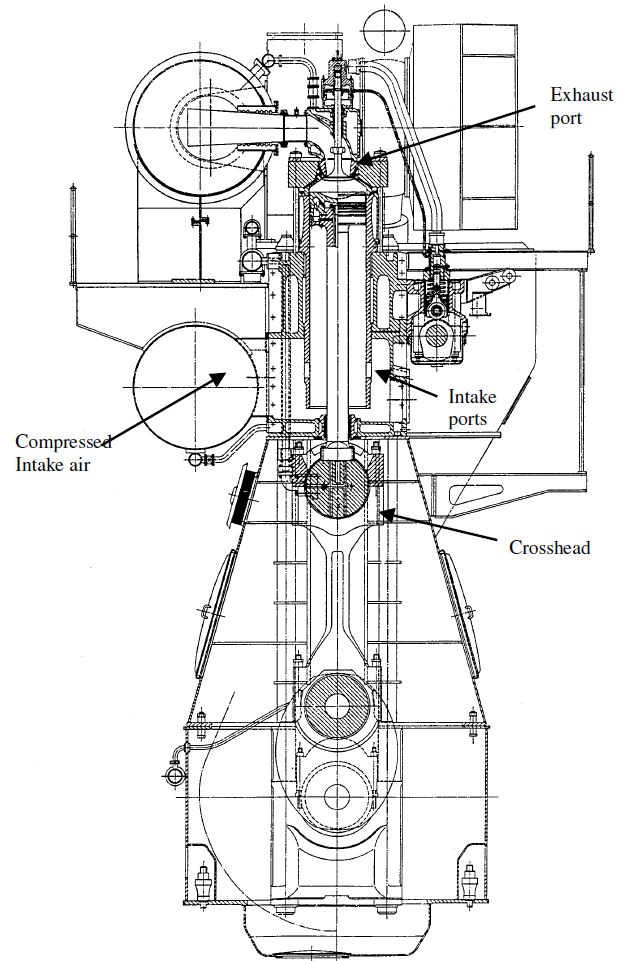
A large 2-stroke Marine diesel engine, the engine shown has a bore of 60 cm and a stroke of 2.29m.
